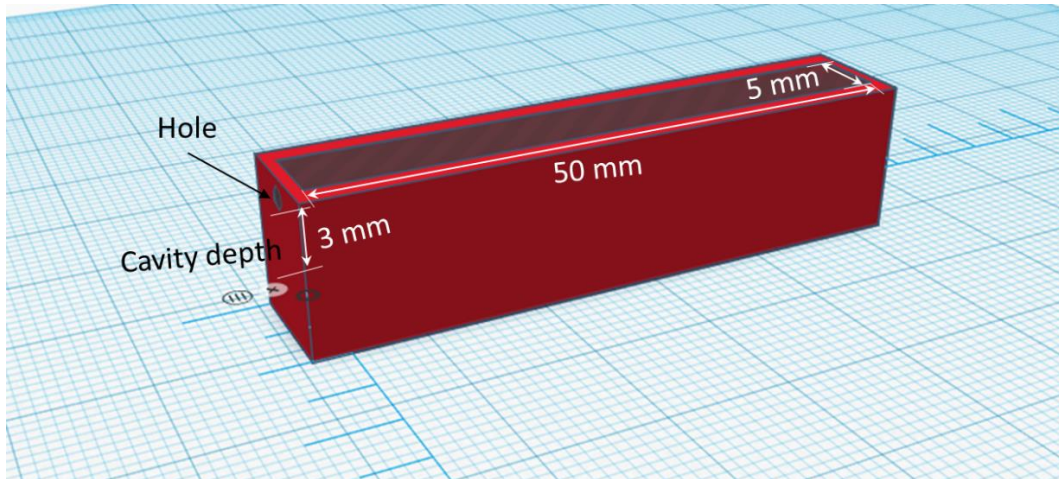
The mould to be filled by silicon rubber and making the sensor
